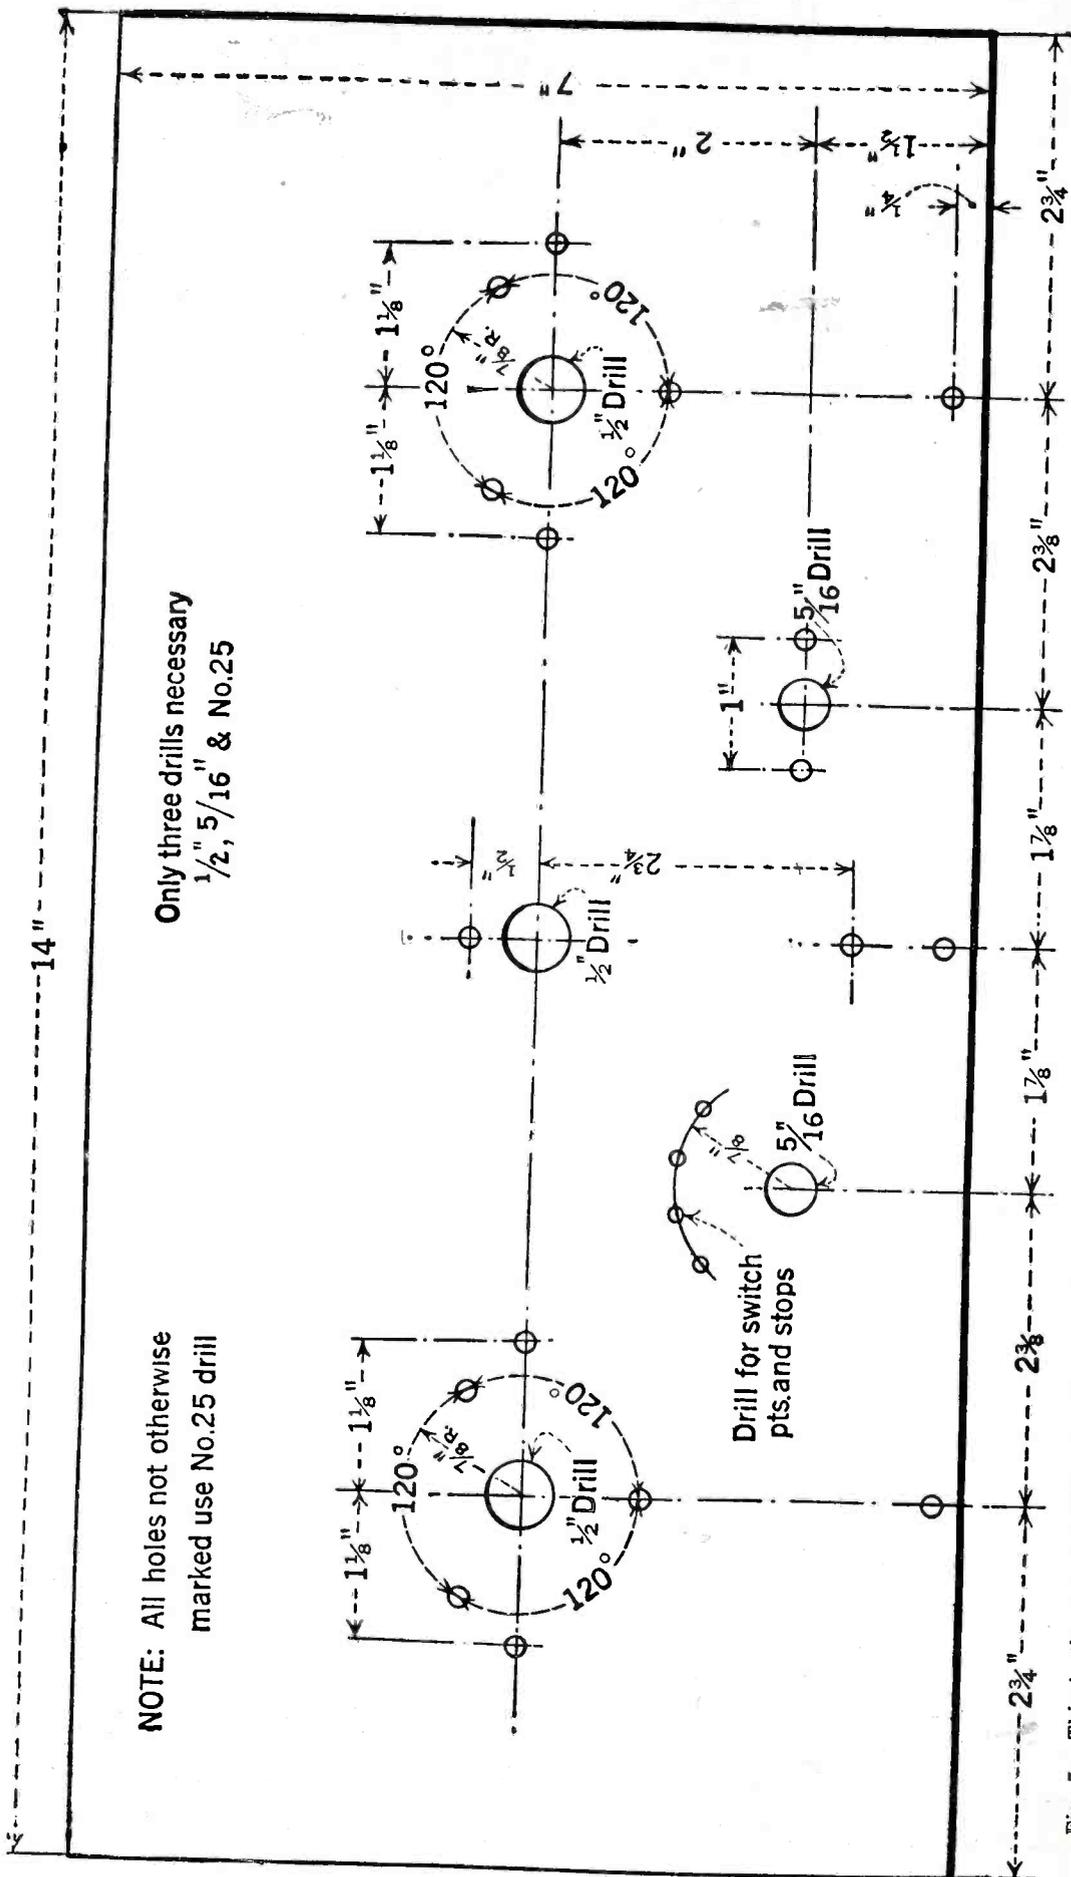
This is the actual drilling template for the panel, and the dimensions given apply to the parts described in this article. Changes will have to be made if other parts are substituted.
